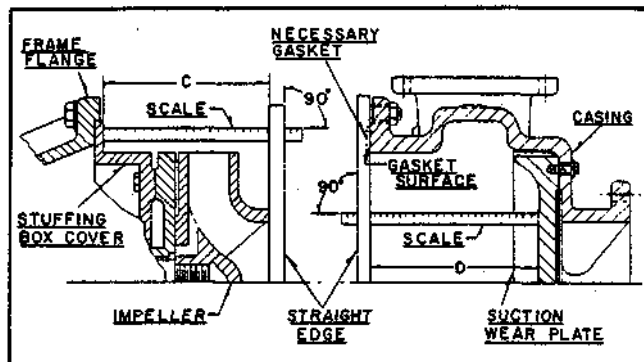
Type "CW and CWR Style" Clearance Adjustment
